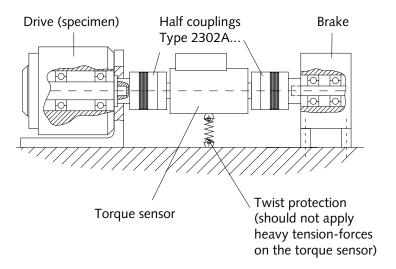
Together with the half couplings the torque sensor forms a full coupling
